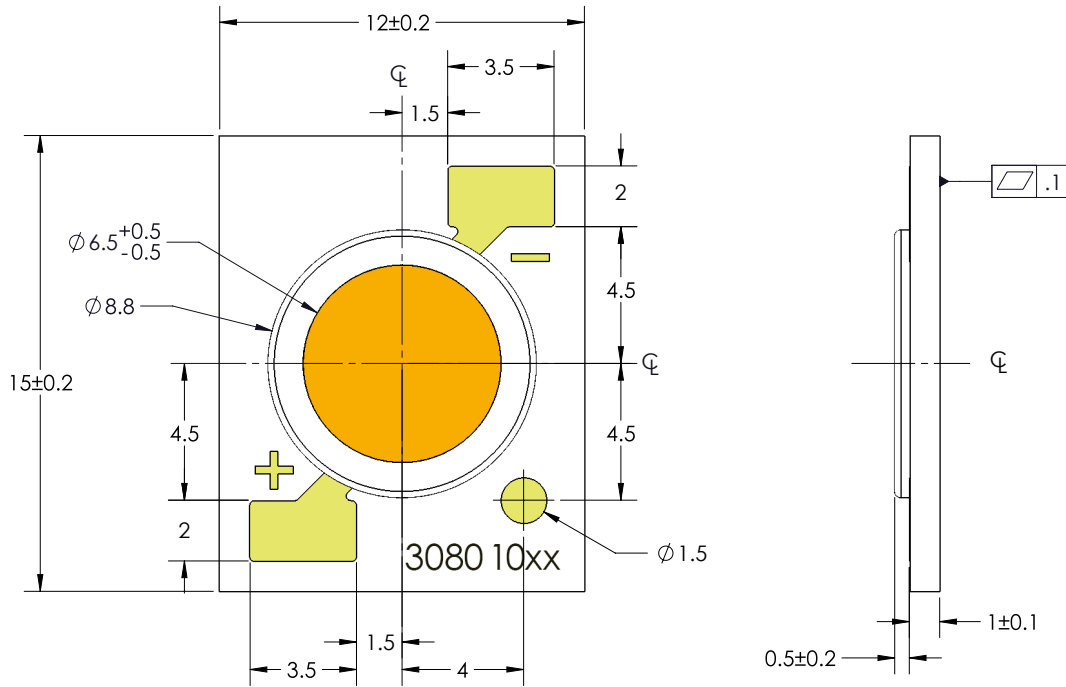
Mechanical dimensions for LUXEON CoB Compact.
